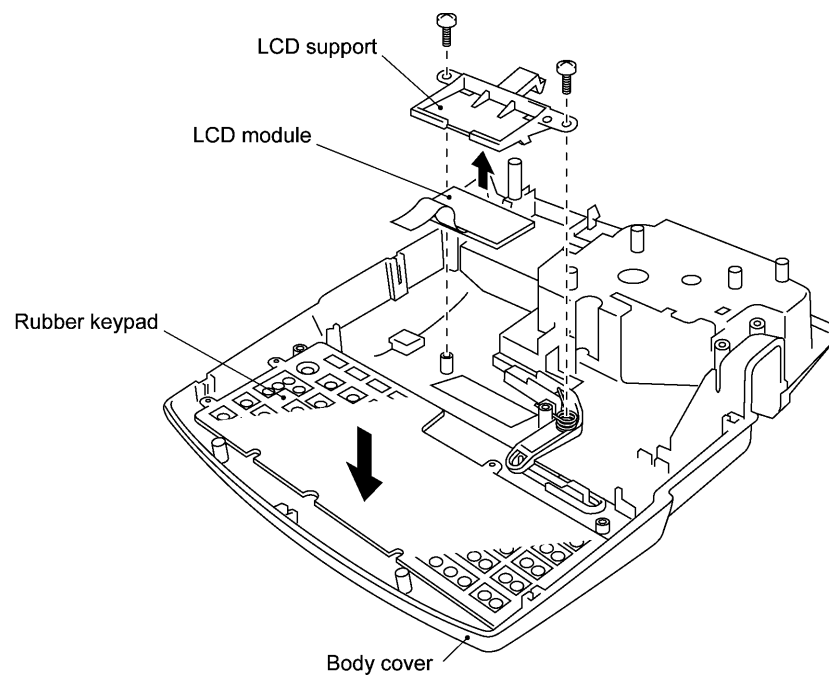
Installing the LCD Module and Rubber Keypad
